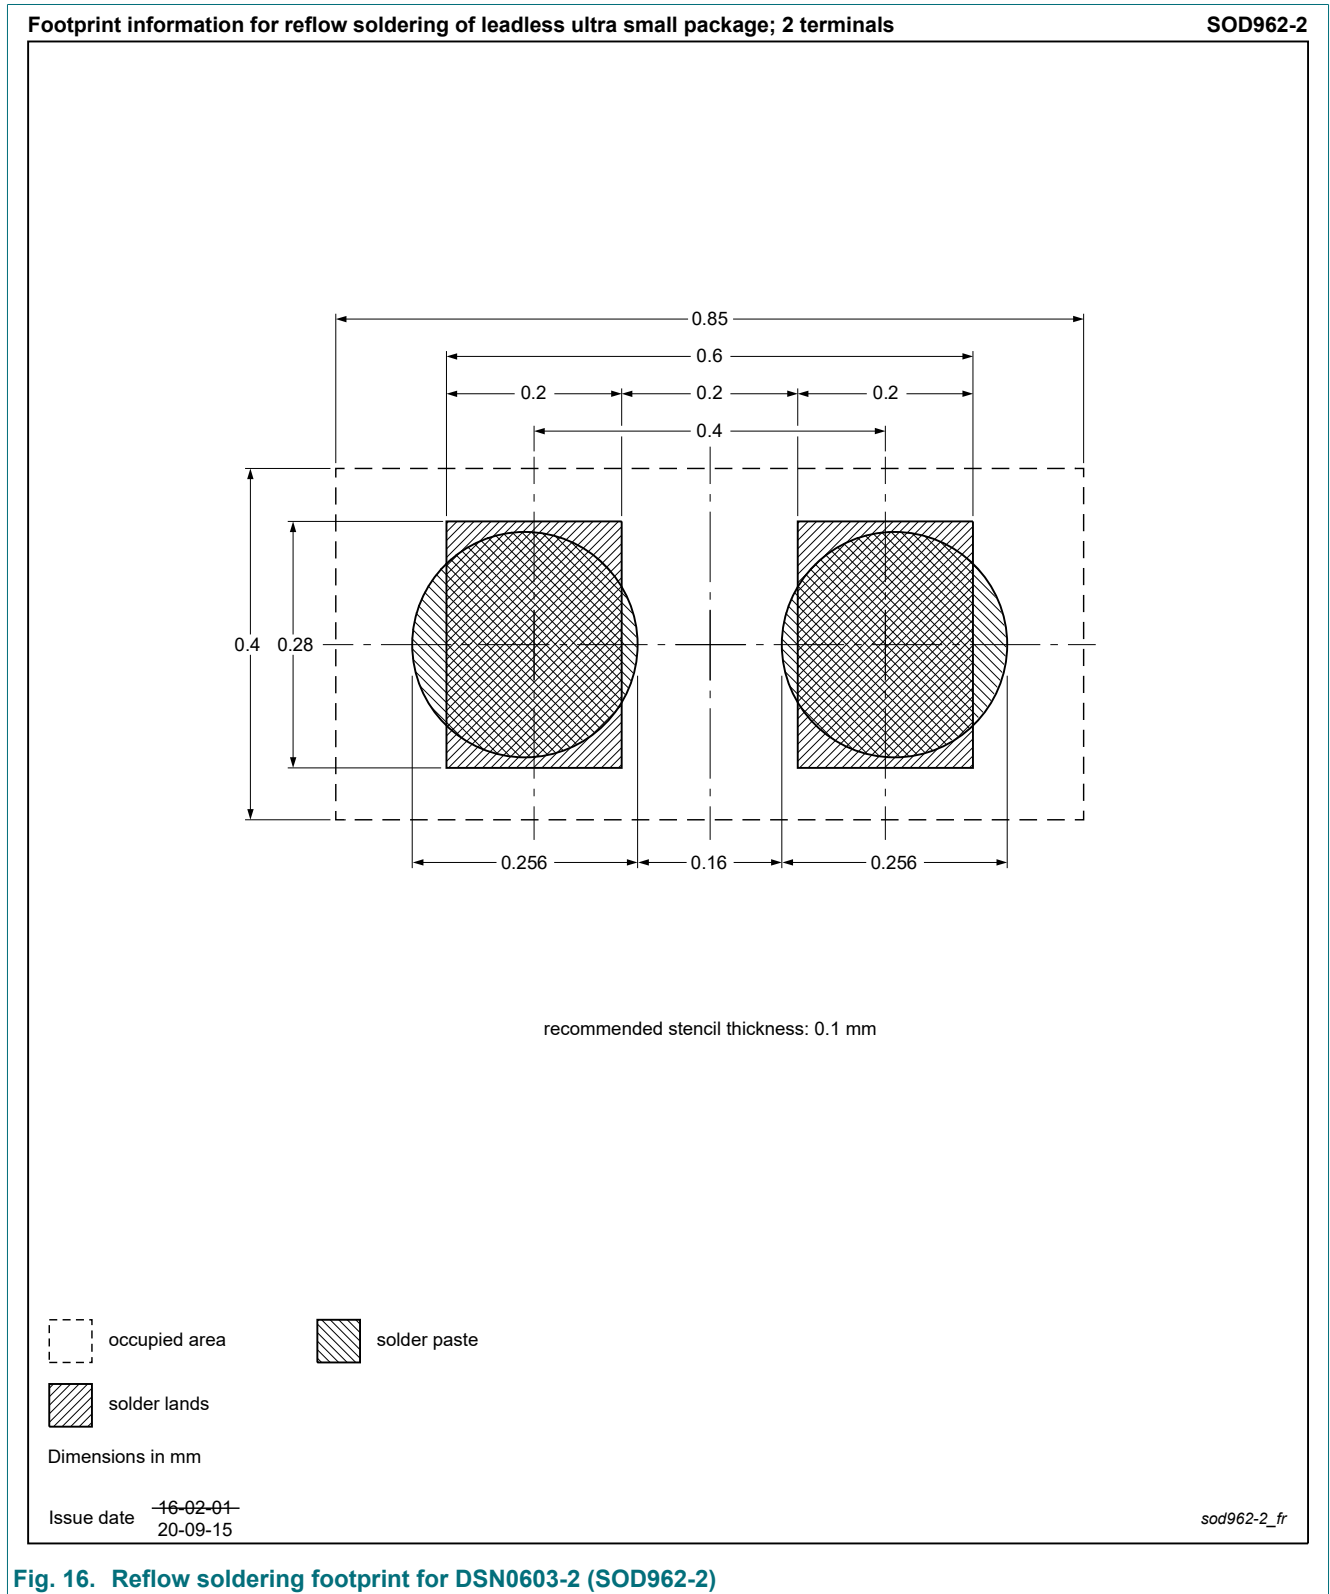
Reflow soldering footprint for DSN0603-2 (SOD962-2)
